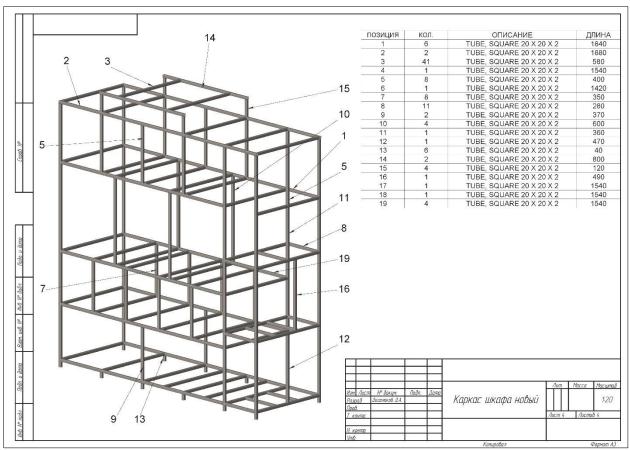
Weldment cut list (floromat cabinet)
